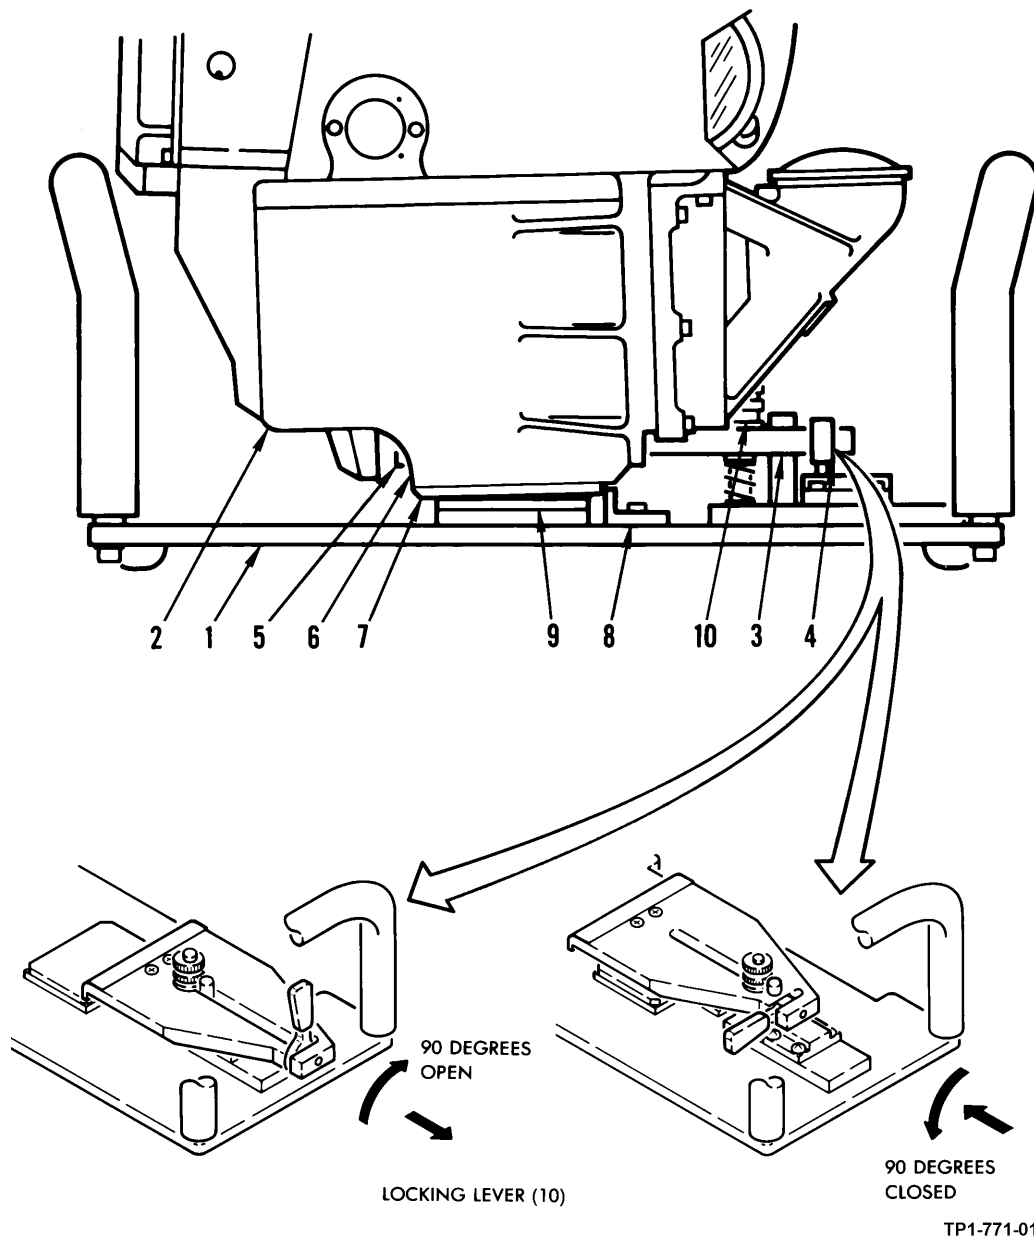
Attachment of Handling Fixture to TADS NSA
